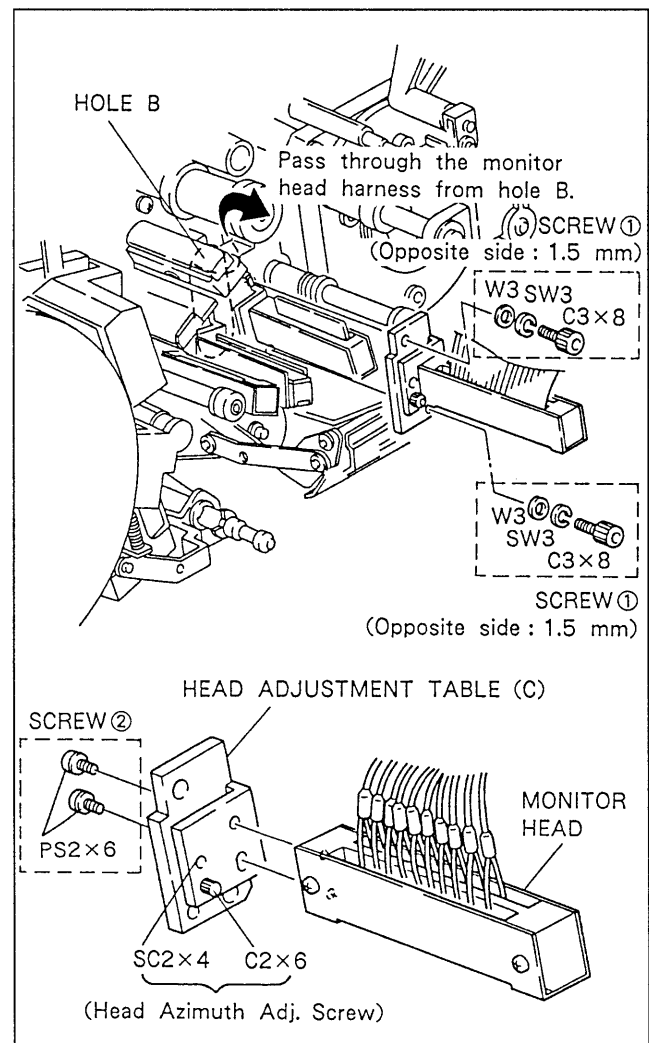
Audio Monitor Head Assembly Replacement
